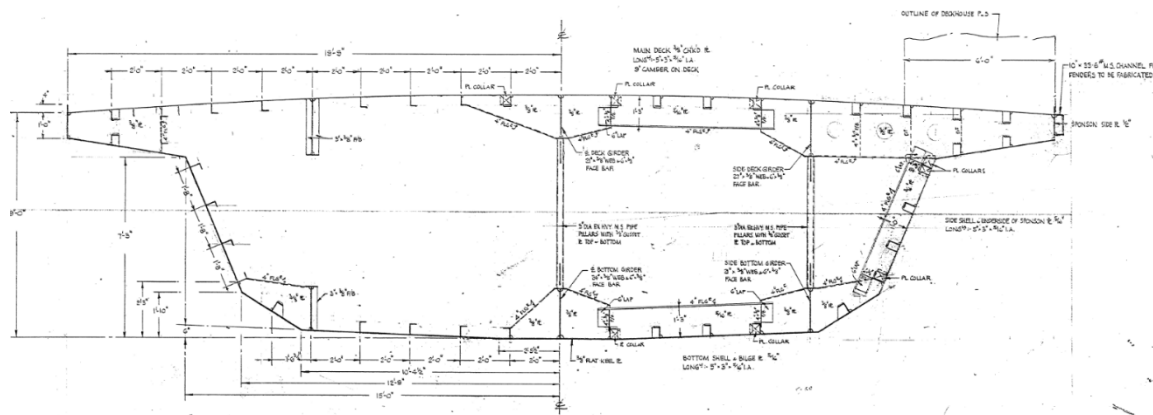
Cross-Sectional View Illustrating Transverse Support Structure
